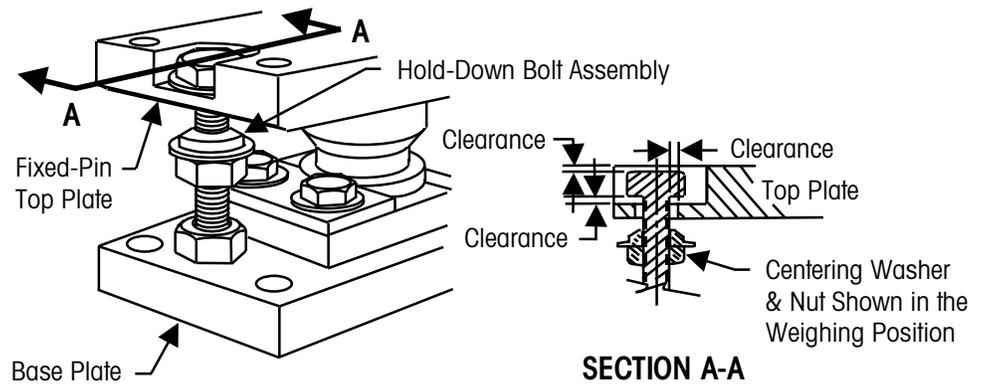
Flexmount HD Hold-Down Bolt Assembly
